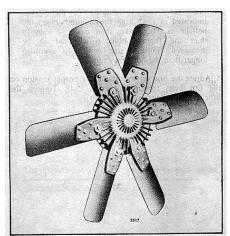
Typical Thermo-Modulated Fan Assembly
